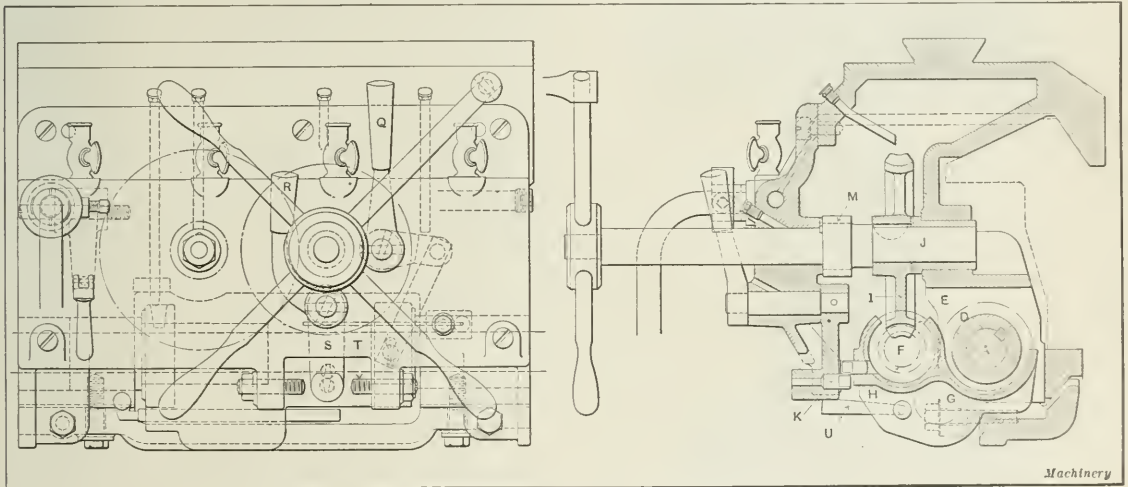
Arrangement of Carriage Mechanism on Fitchburg 8-inch "Lo-swing" Lathe
